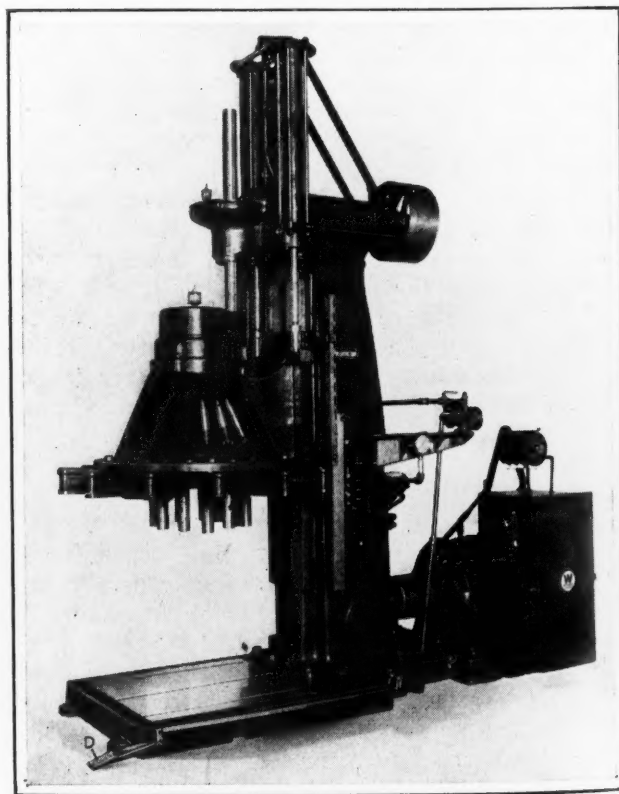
Right-hand Side of the Hydraulic Drilling Machine
